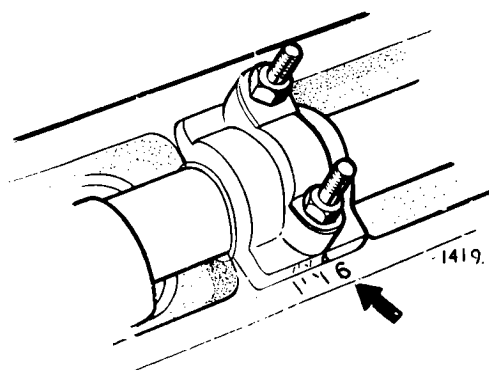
Showing the corresponding numbers on the bearing cap and cylinder head.
